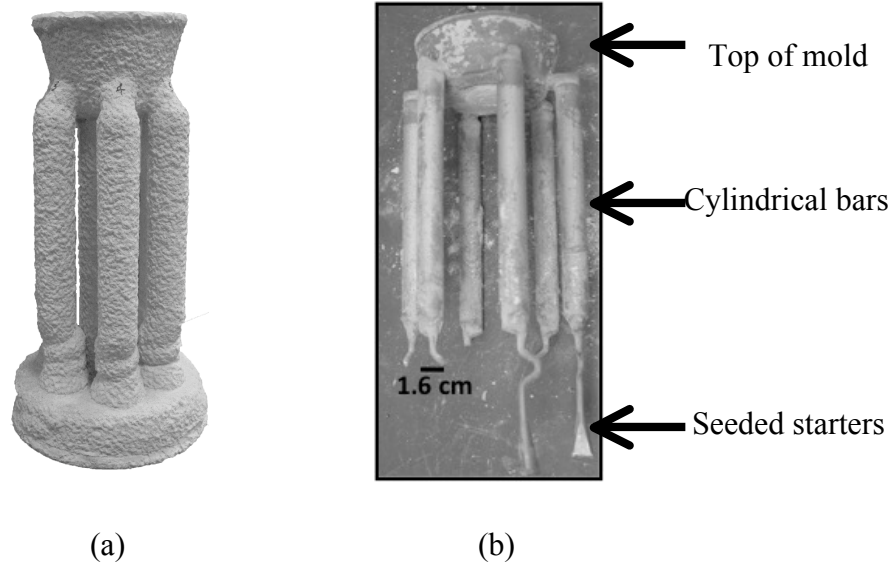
(a) Investment mold utilized in the Bridgman and LMC casting processes. (b) Ceramic mold and tin remnants removed post-casting to reveal the 6-bar mold-configuration for grown single-crystals.
